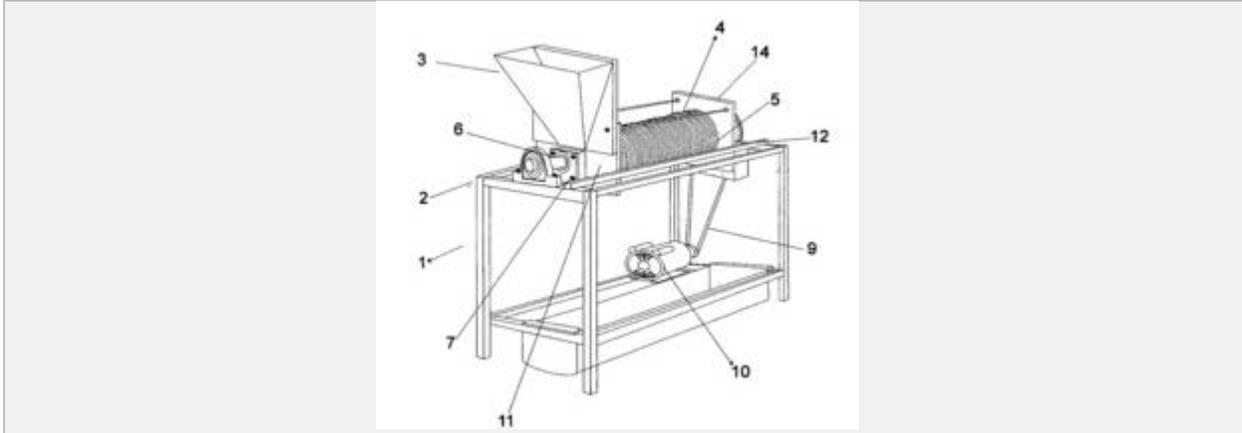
Palm fruit threshing machine disclosed in BRPI001226 by Souza Carlos Alves De.
